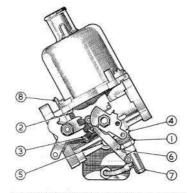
EXTERNAL VIEW OF THE HS4 CARBURETTER.
